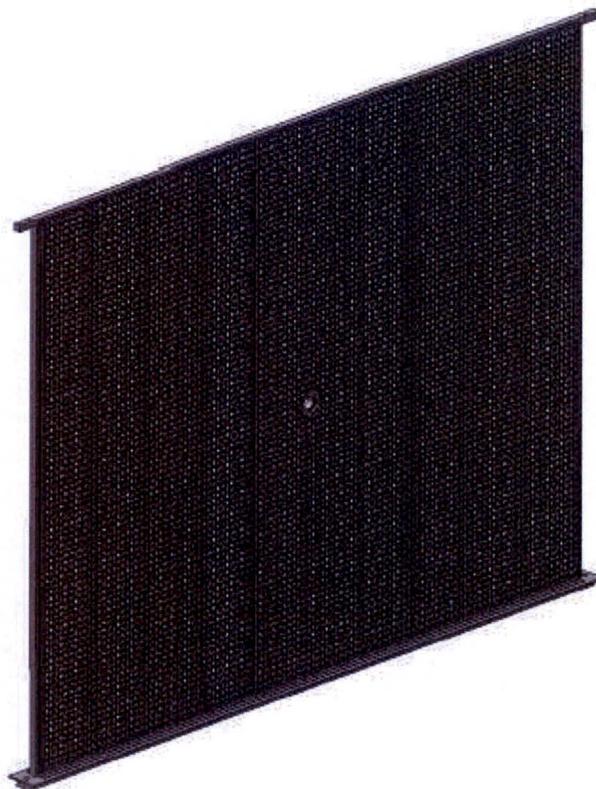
j.1-4: PSL1 Strainer Disk Assembly – Typical [JT469]
